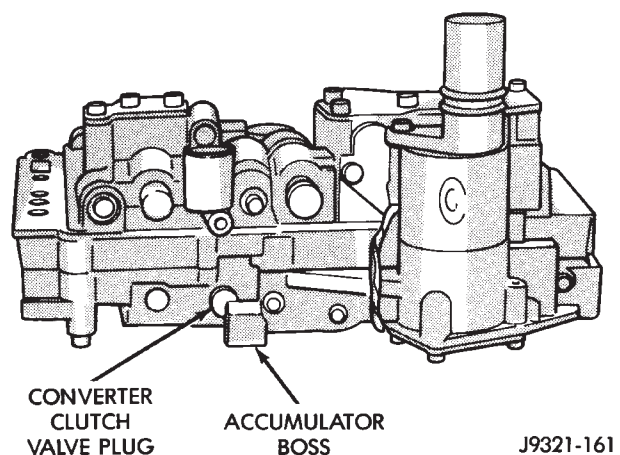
Seating 3-4 Accumulator On Lower Housing—46RH
